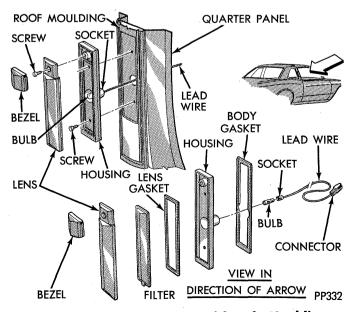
"B" Post Opera Lamp with Halo Moulding— Carline F
